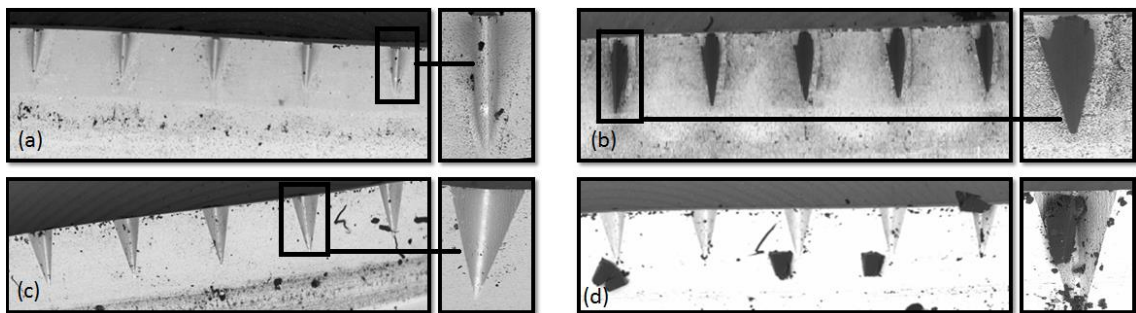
SEM image of laminate (a) core side before moulding (b) core side after moulding showing the breakage during ejection (c) V-side of the laminate before moulding (d) V-side after moulding showing fragments of polymer sticking into the cavity.
